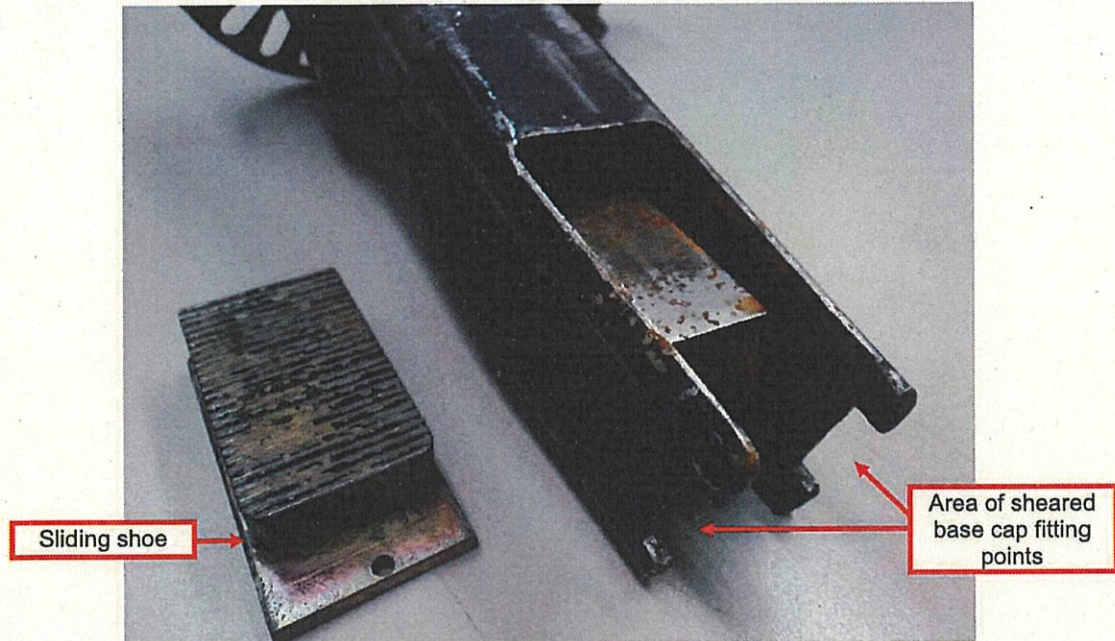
Failed clamp assembly, Ser No - ESK02442
